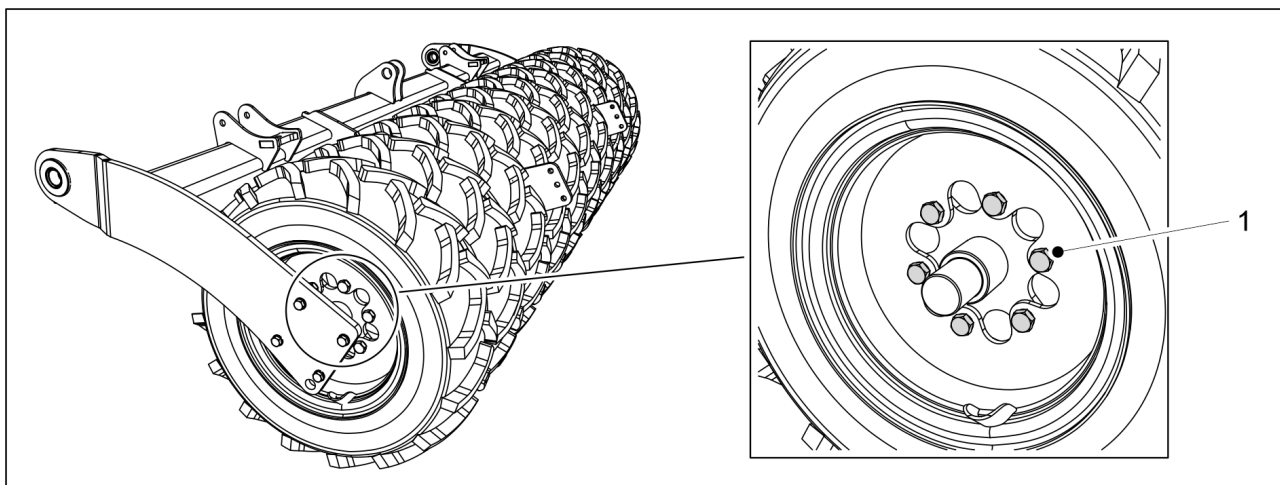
212. Wheel bolts of the transport wheels
